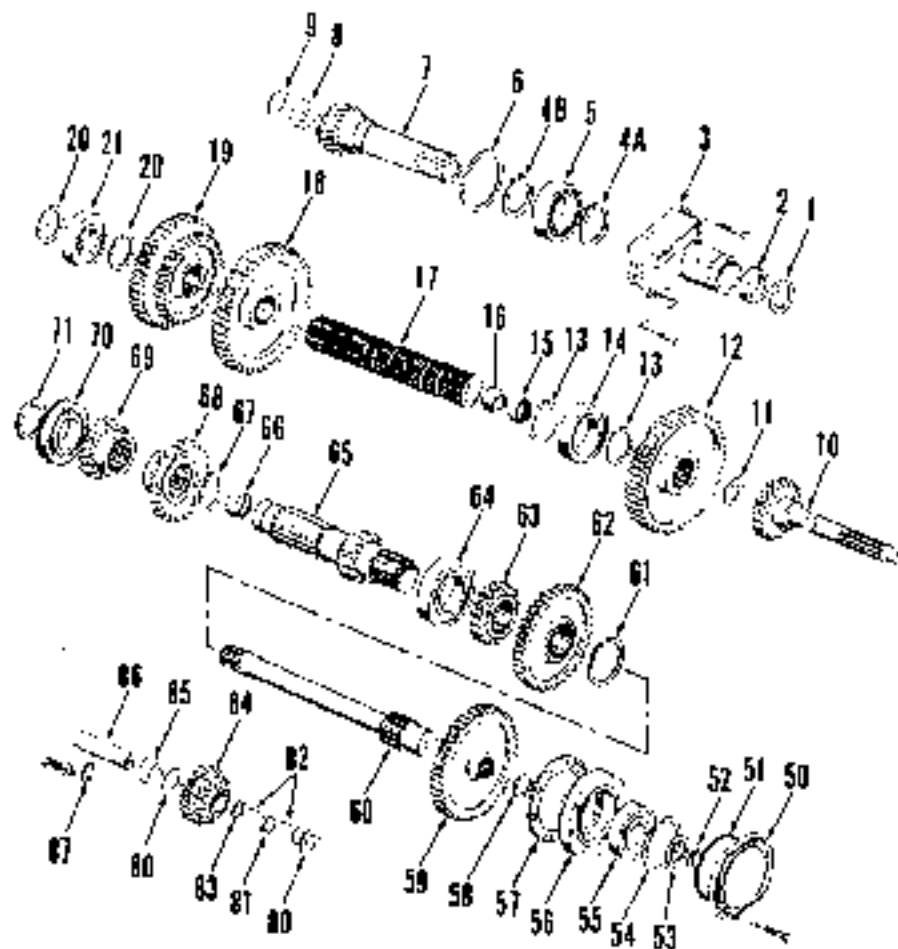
Exploded view of eight-speed transmission input shaft, mainshaft, pto shaft, countershaft gears and related components. Planetary unit is shown in Fig. 128.
